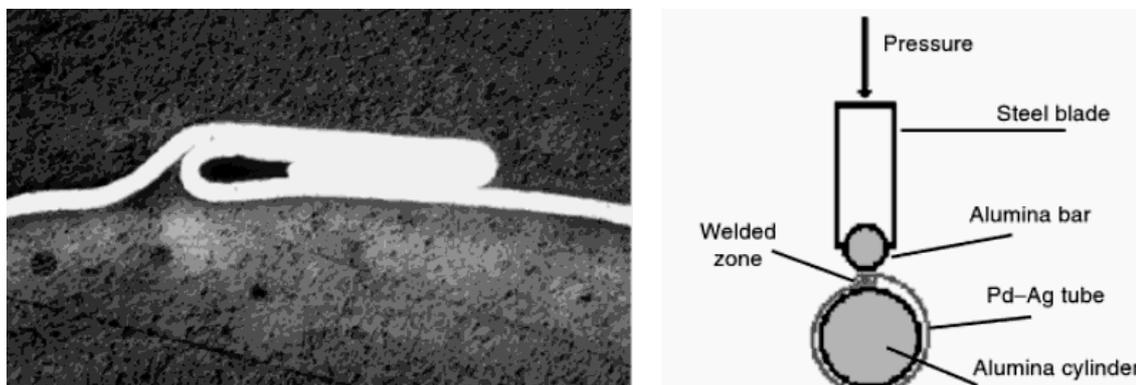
(left) Cross section of welded zone of a Pd-Ag alloy foil. (right) A schematic draw of the welding set-up for welding the membrane tubes (Mallada, 2008)
